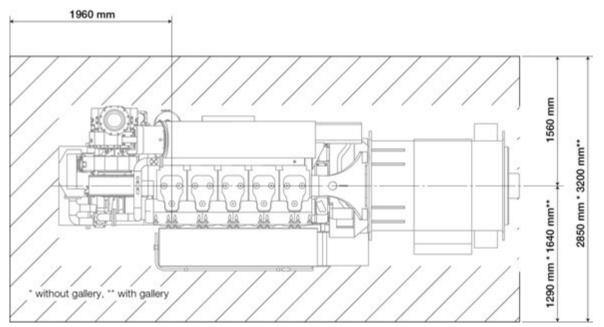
Overhaul areas for charge air cooler element, turbocharger filter element, lubricating oil cooler, lubricating oil filter cartridge and bracing bolt
